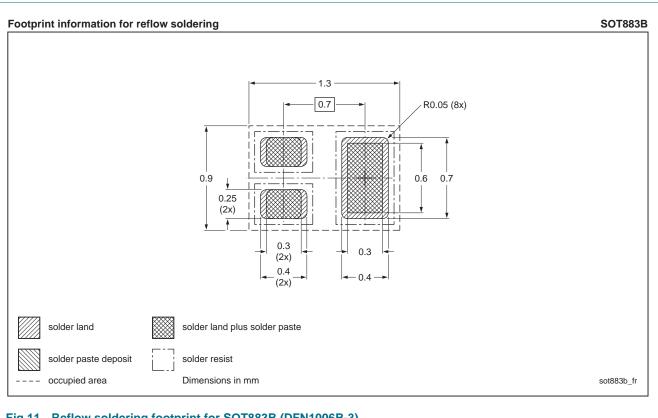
Reflow soldering footprint for SOT883B (DFN1006B-3)
